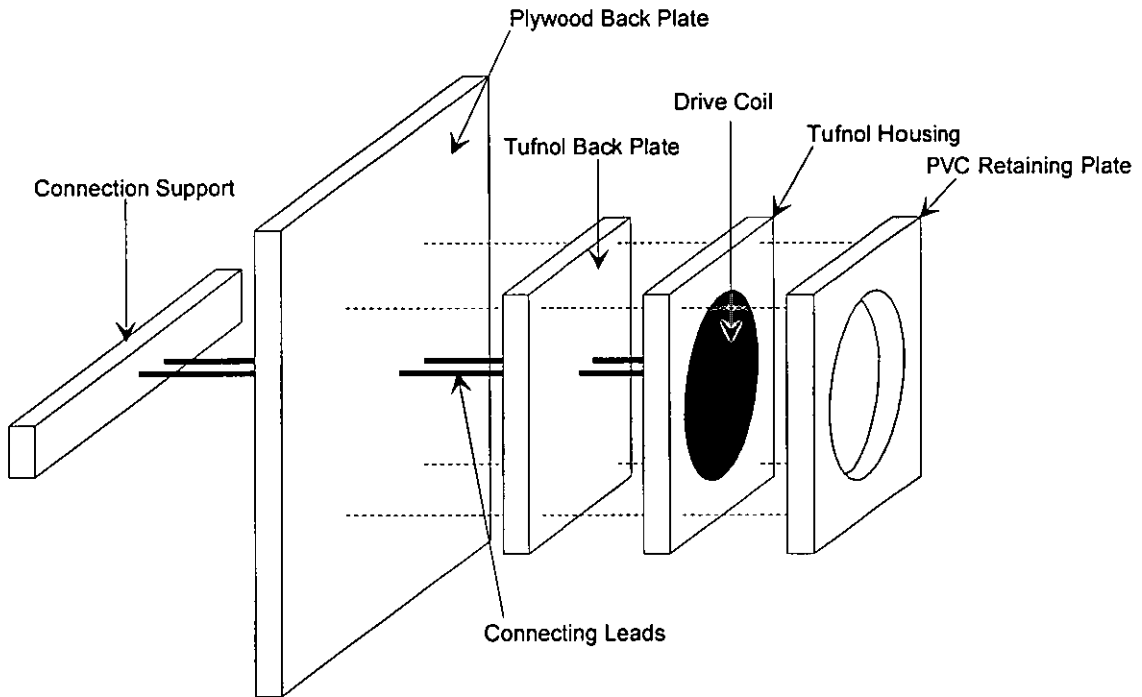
Exploded diagram of the single projectile launcher arrangement
